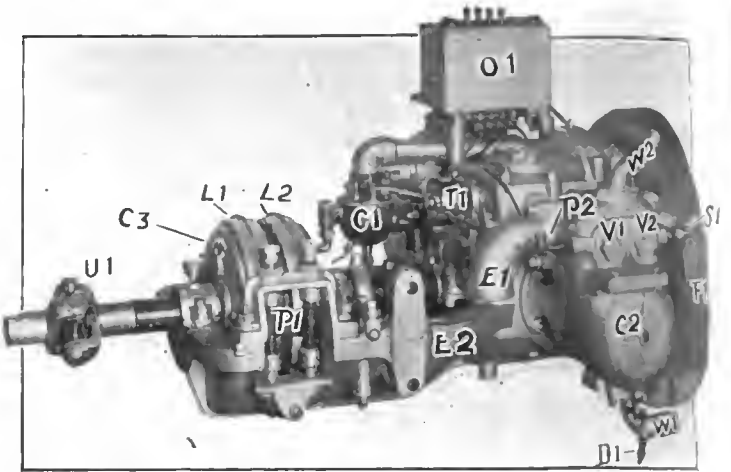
Self-contained power plant showing 2-cylinder opposed motor, and extension of crankcase casting to house the planetary
